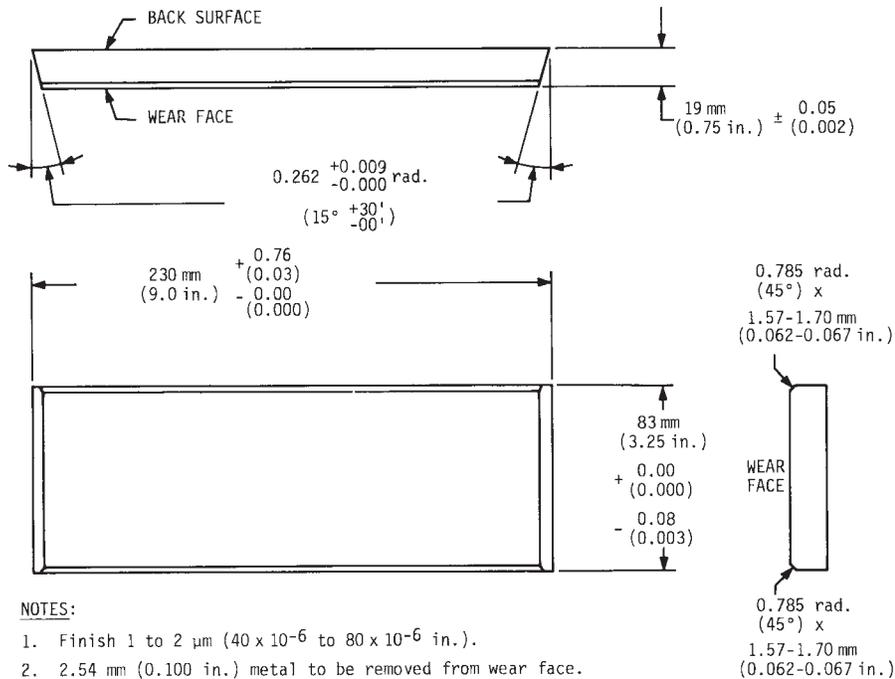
Example Test Plate Dimensions for Modified Mine and Smelter 100 by 150 mm (4 by 6 in.) Jaw Crusher
